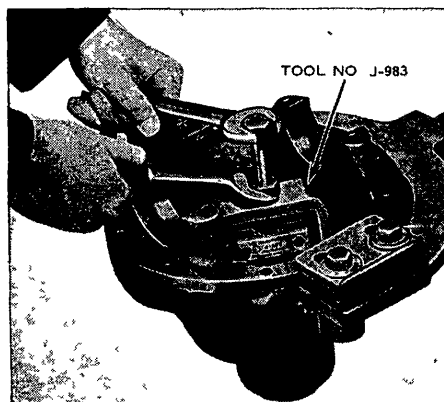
Removing drive pinion bearing outer race, 1937-46
